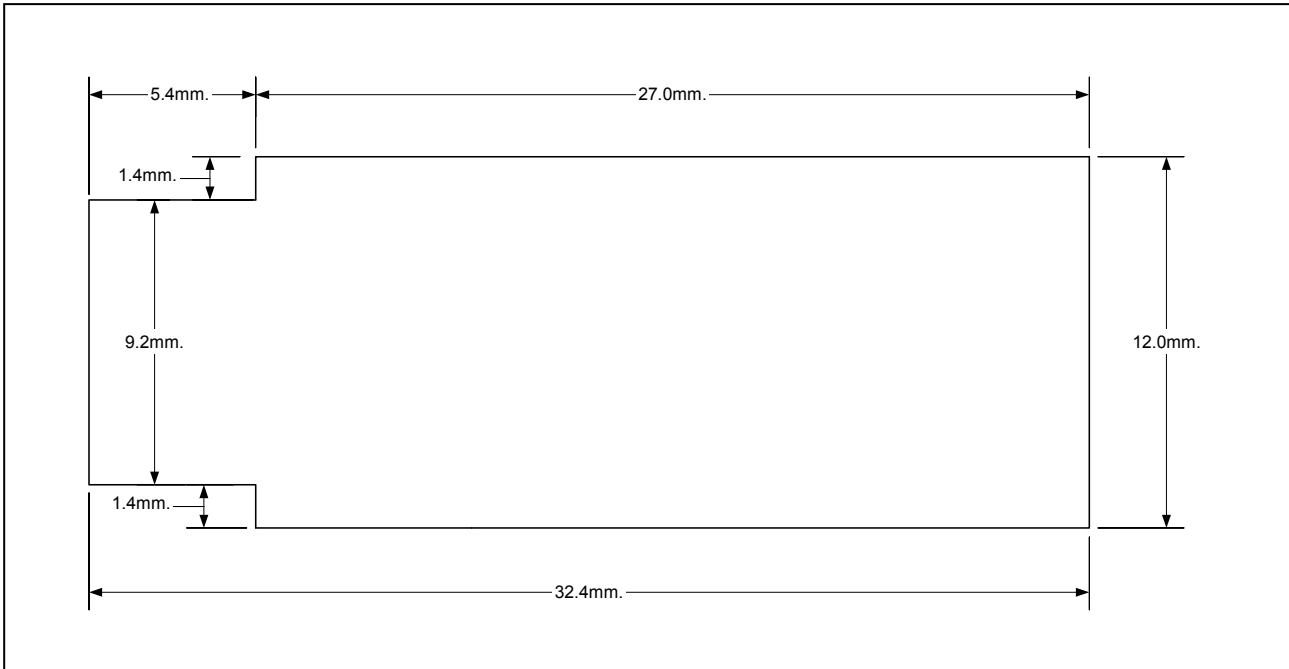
Board Dimensions See SFP MSA for additional dimensions.
